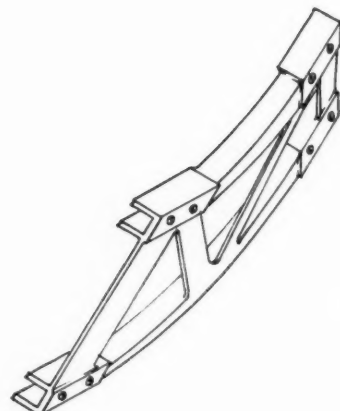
Original "gooseneck" assembly. Weight 67½ lbs.
